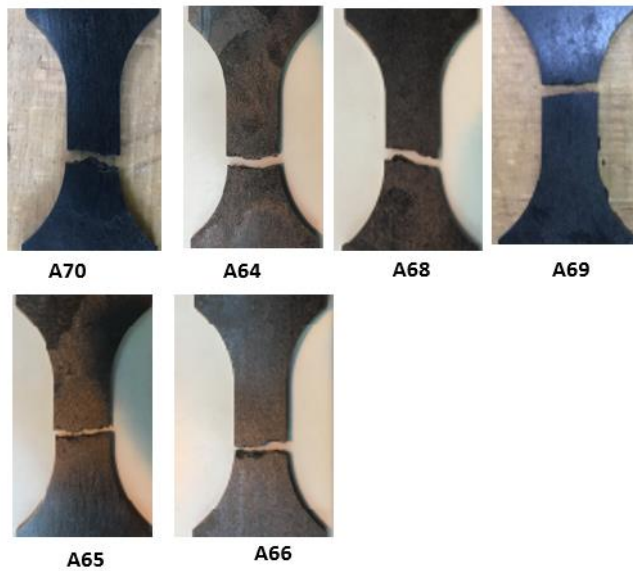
Fracture specimens for 0° coupons at R=0.3.
